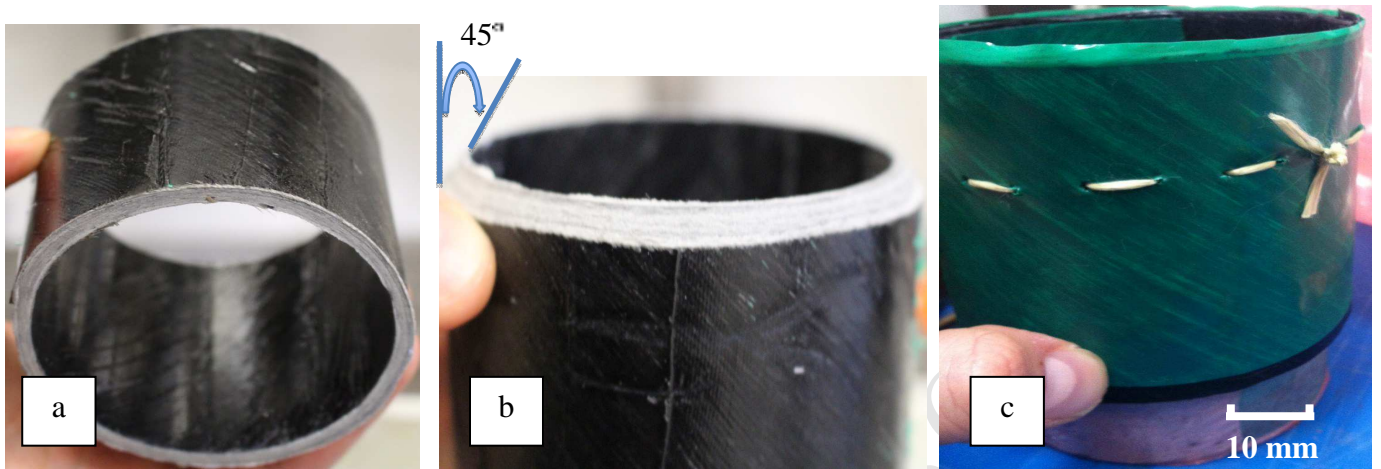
a) Composite crushing tube, b) bevelled trigger mechanism, and c) stitching technique.
